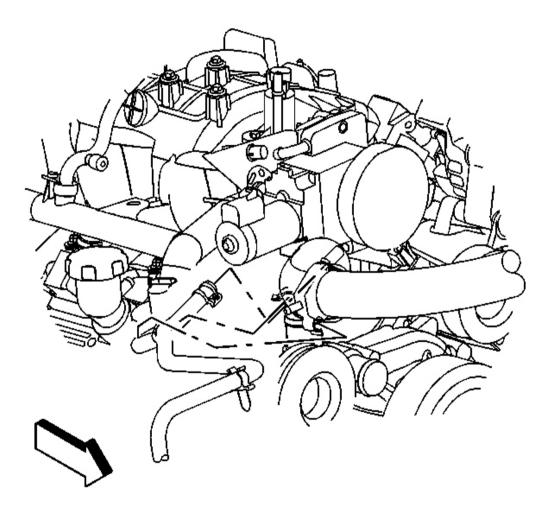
Vent Inlet Hose At Throttle Body Courtesy of GENERAL MOTORS CORP.
